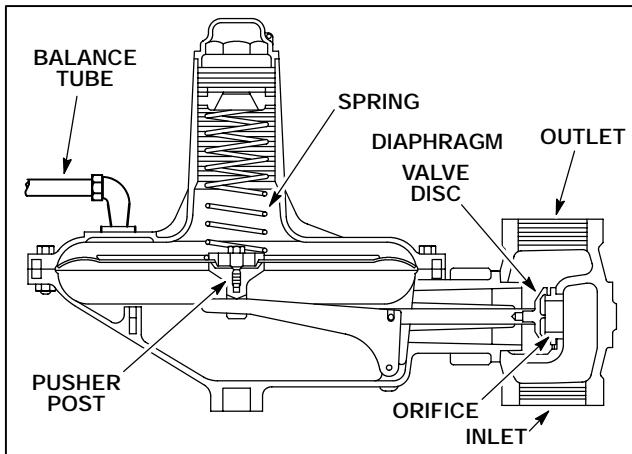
Fuel Pressure Regulator - S211 Shown
